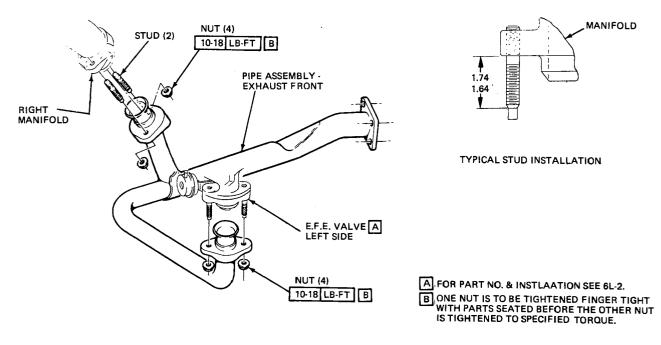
D-8 X Series Exhaust Pipe to Exhaust Manifold 231 and 350 Engines
